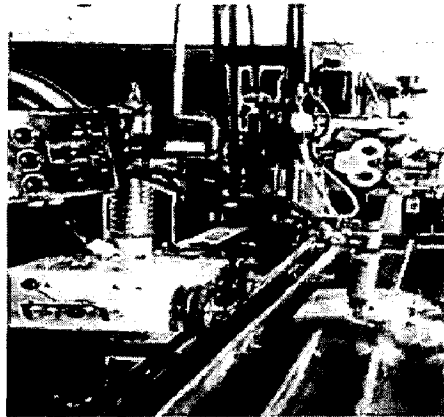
Submerged Arc Welding (SAW) Process
